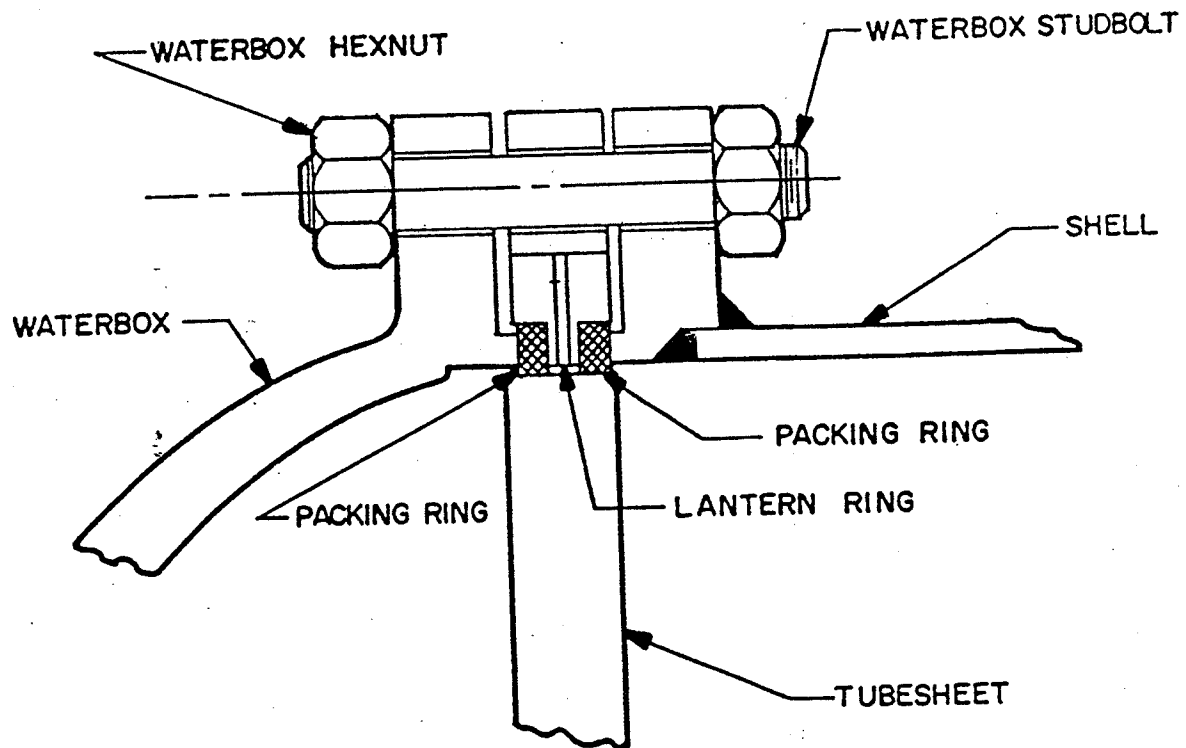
Straight tube, floating head, removable bundle, outside packed lantern ring construction; waterbox studbolt threaded into lantern ring.
